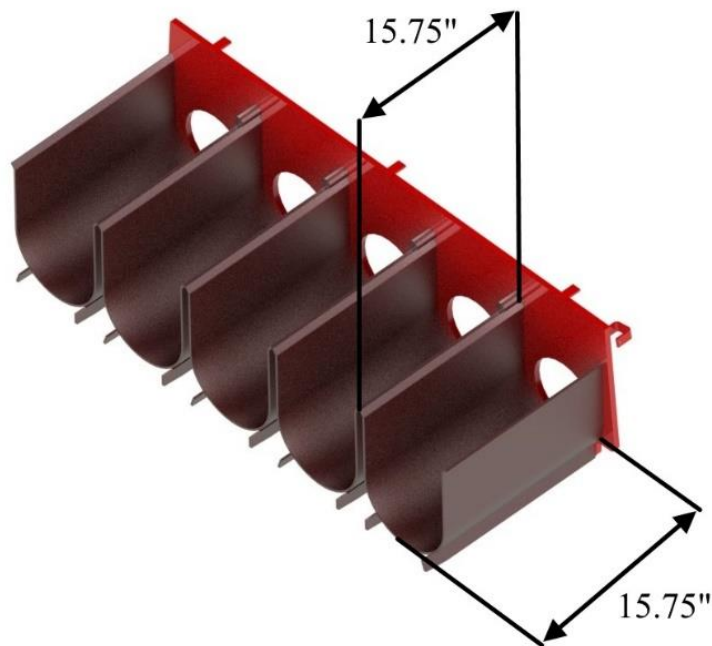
Concept D: Sealed and Elongated Material Shields with dimensions (isometric view)
